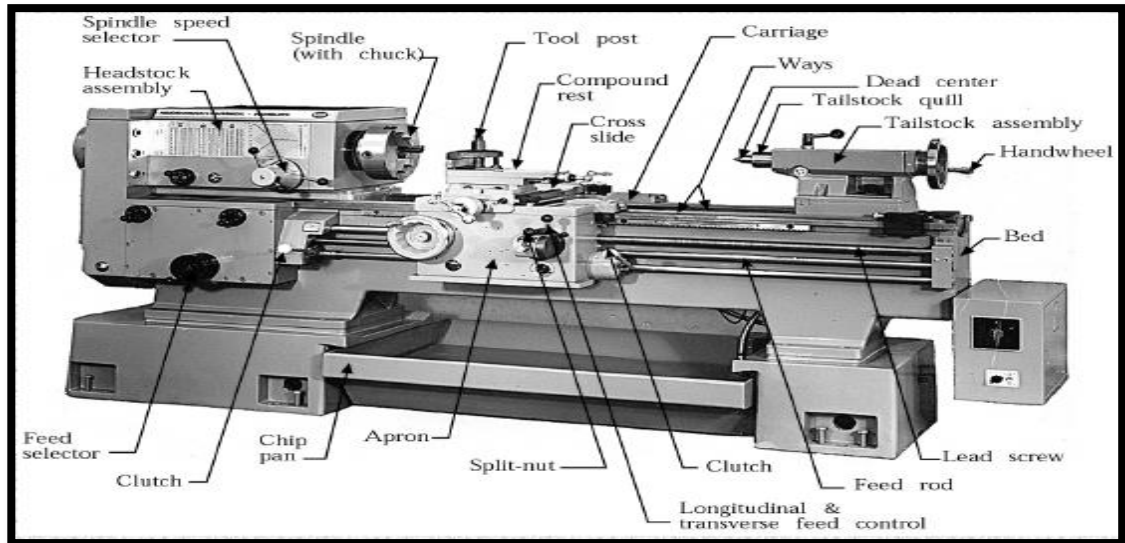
Lathe Machine (Kalpakjian and Schmid, 2009)
